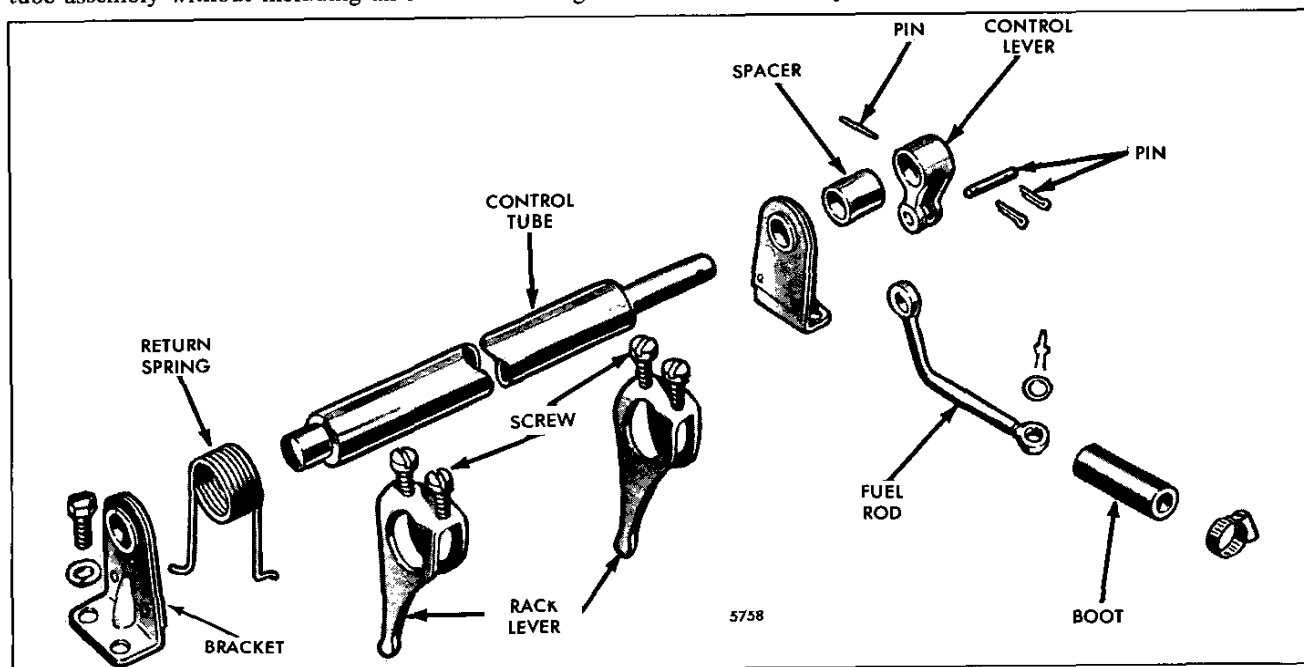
Injector Control Tube Assembly (Non-Spring Loaded - In-line Engine)
